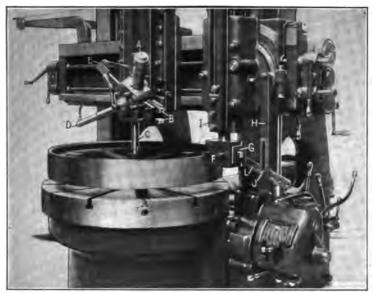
Gisholt Mill equipped with Convex Turning Attachment
